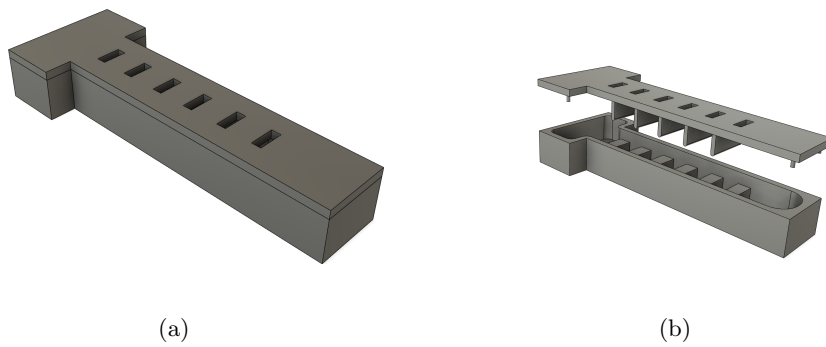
These figure show the actuator chamber mold for Version 1. Of note is the lightweight construction of the top half of the mold which led to the mold breaking.
